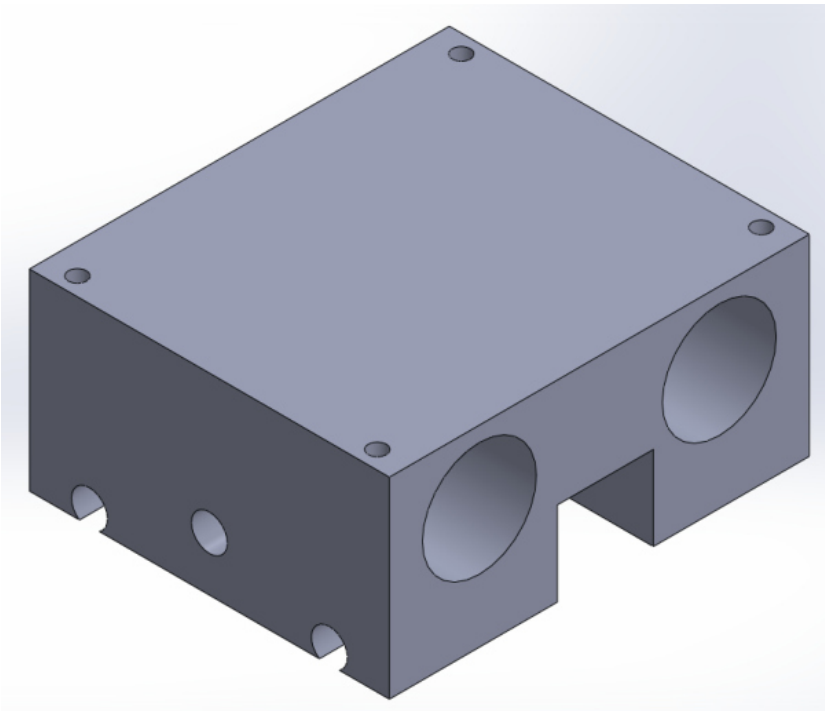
'LaserBase v1'. This is the toolhead mounting platform.
